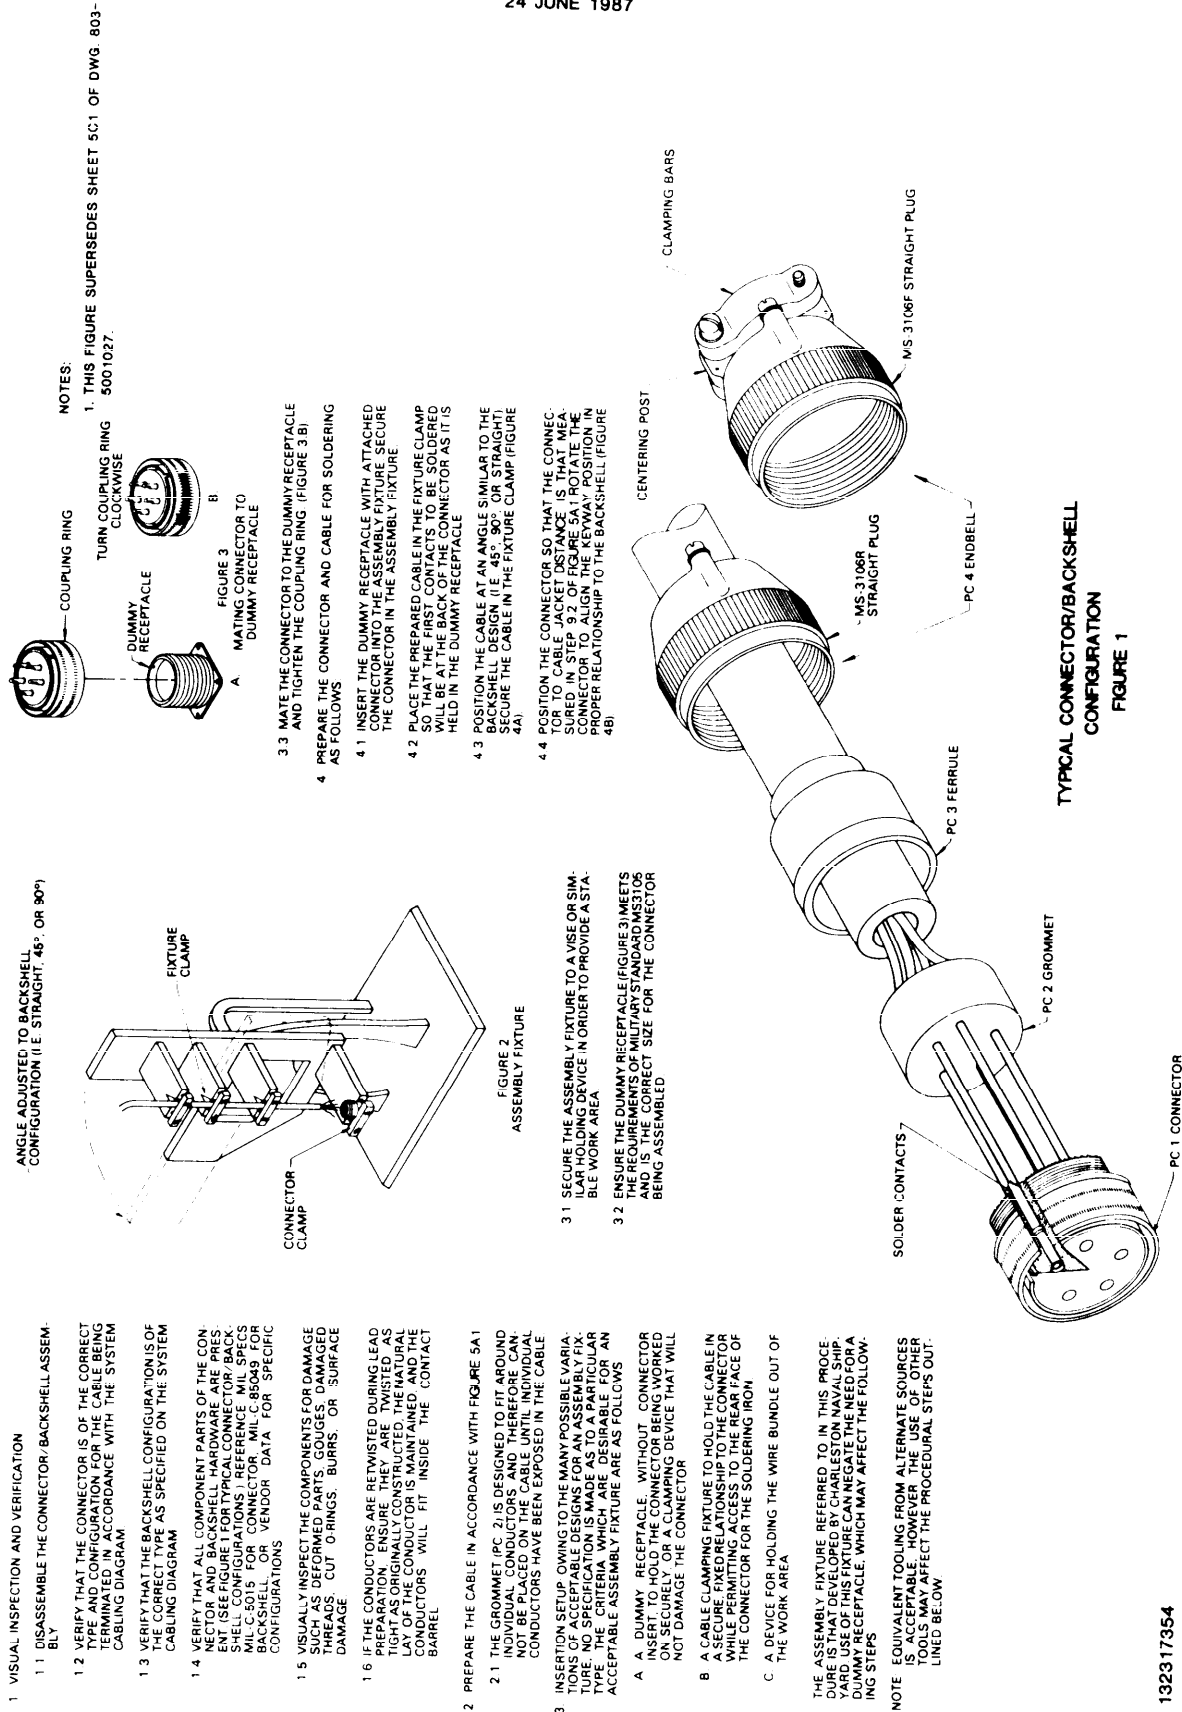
C1. MIL-C-5015 solder connector assembly procedure.
